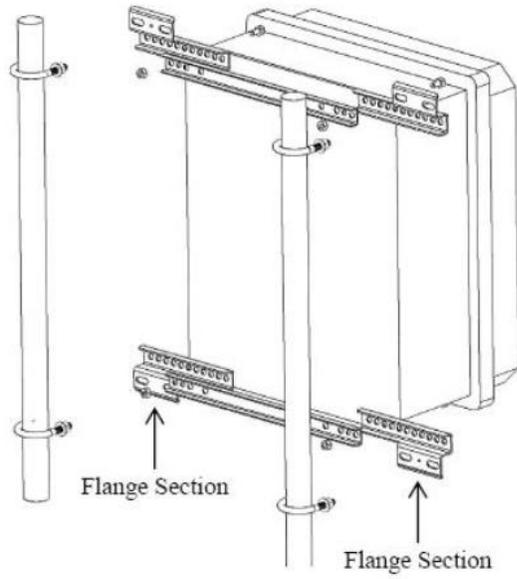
This exploded view shows the components of a tower mount bracket option.
